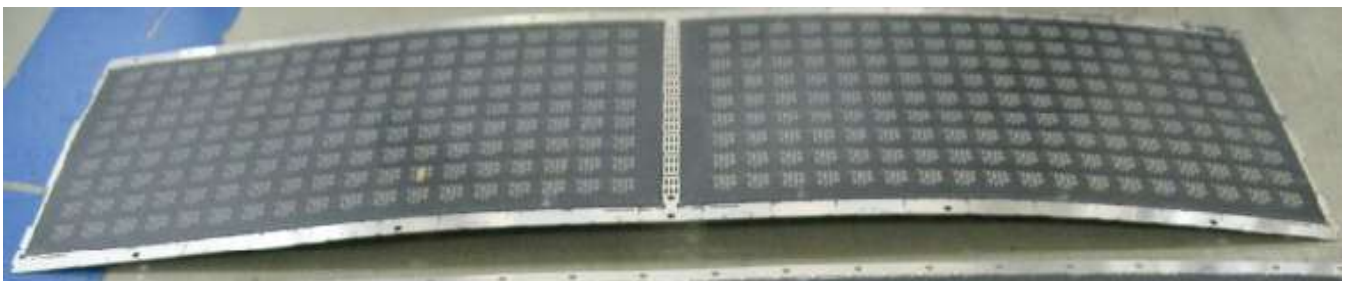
Actual photo of a molded QFN leadframe strip with excessive warpage.
